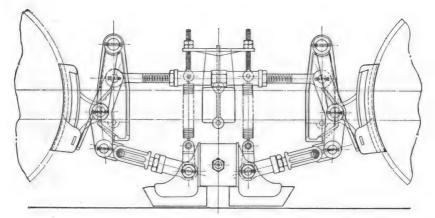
Westinghouse Magnetic Brake on Brill Single Truck operated by No. 21 Magnets.
